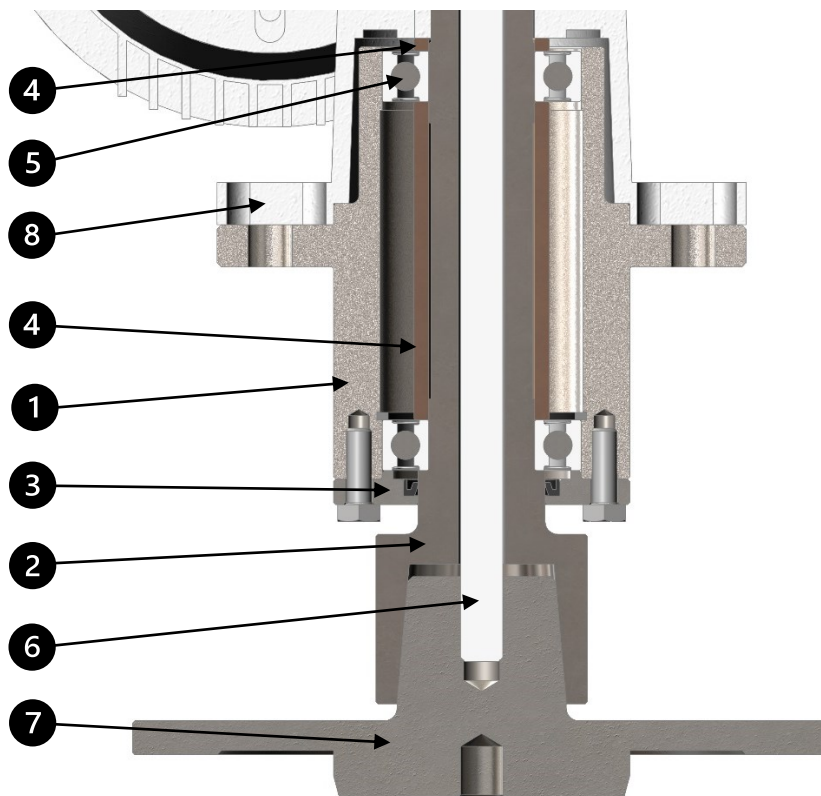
Internal spindle assembly. (1) Housing. (2) Shaft. (3) Lid. (4) Hubs. (5) SKF 6005-2RSH bearings. (6) Threaded rod. (7) Fixture disc. (8) Gear-motor flange.
